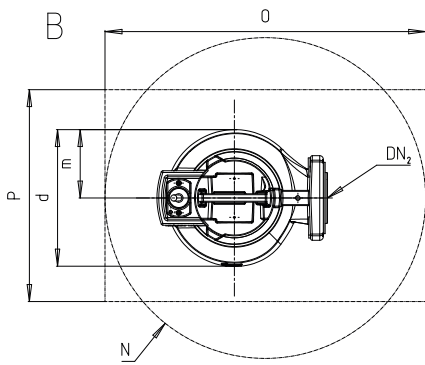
Mounting bracket dimensions, guide wire arrangement
